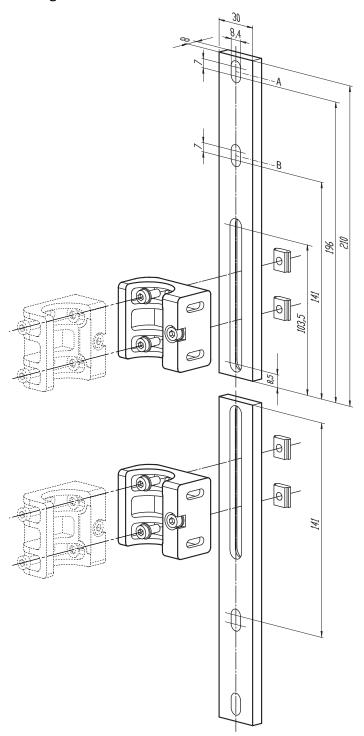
Dimensional drawing of the exchange bracket (2071021)
